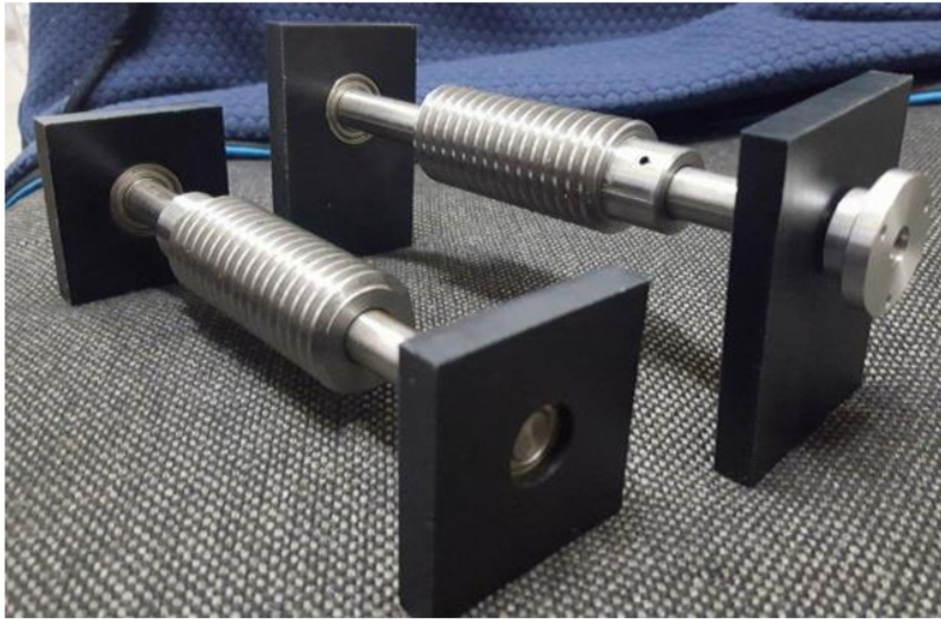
Fixing the shaft and the large coupling in their housing parts.
